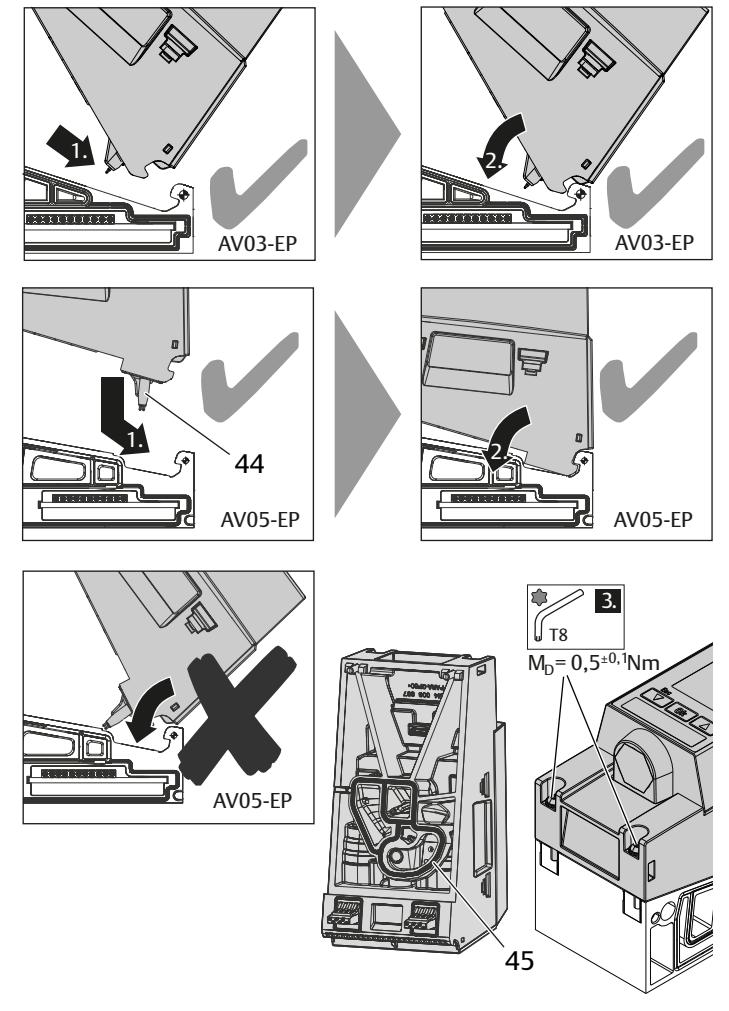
Assembling the AV-EP pressure regulator on a base plate
